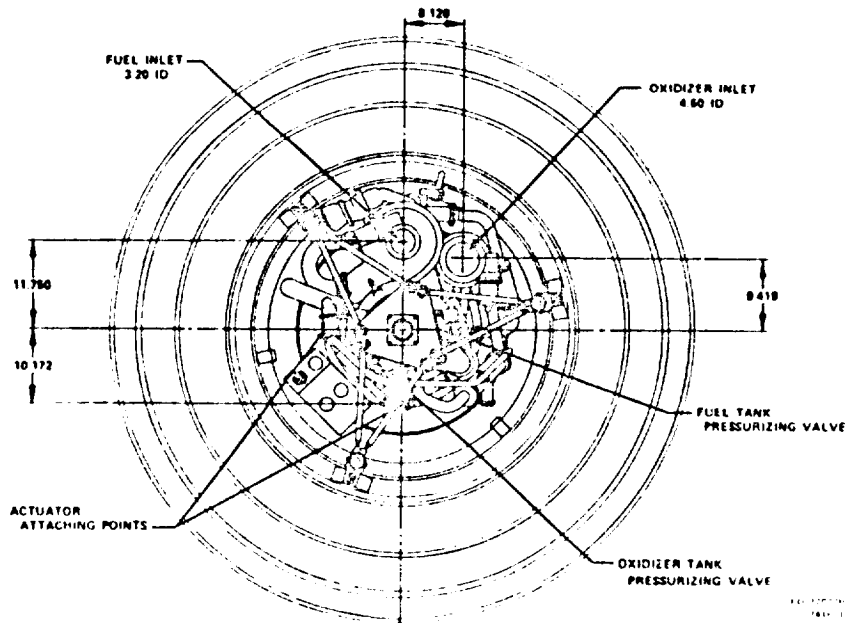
Derivative IIA Engine Installation Drawing (Sheet 2)
